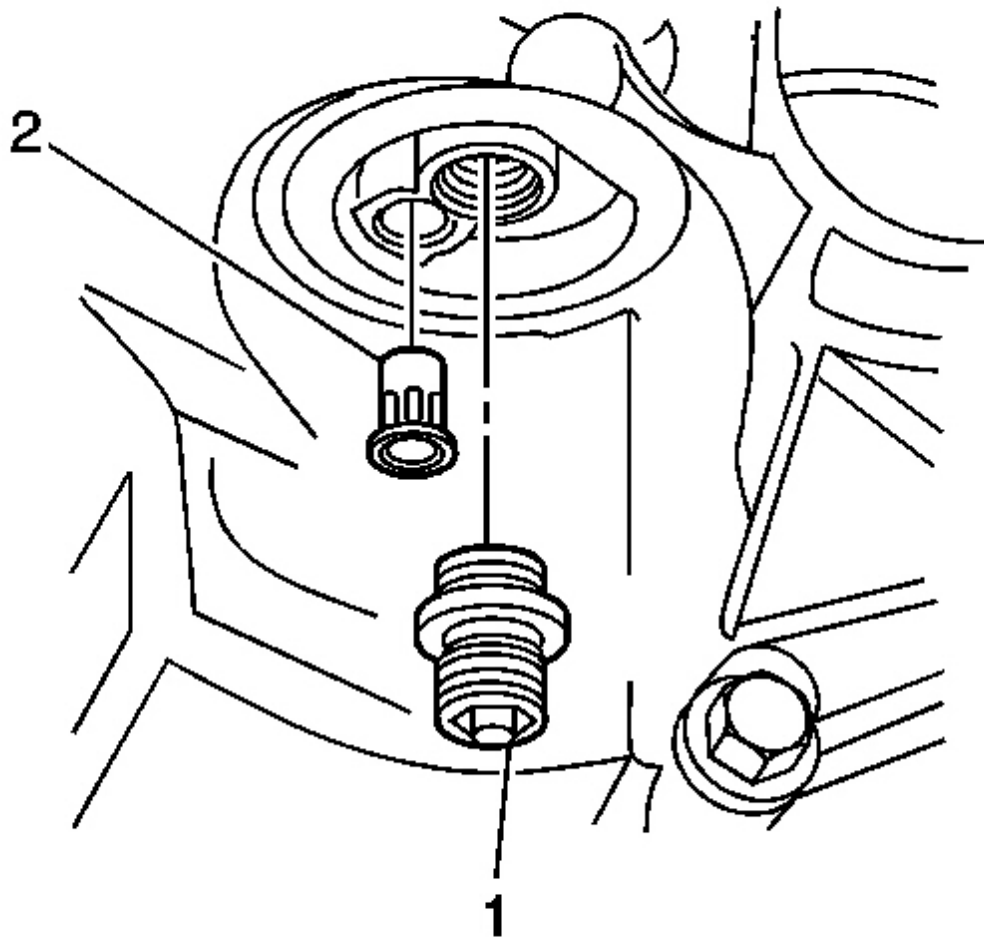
Oil Filter Adapter & Oil Filter Bypass Valve
